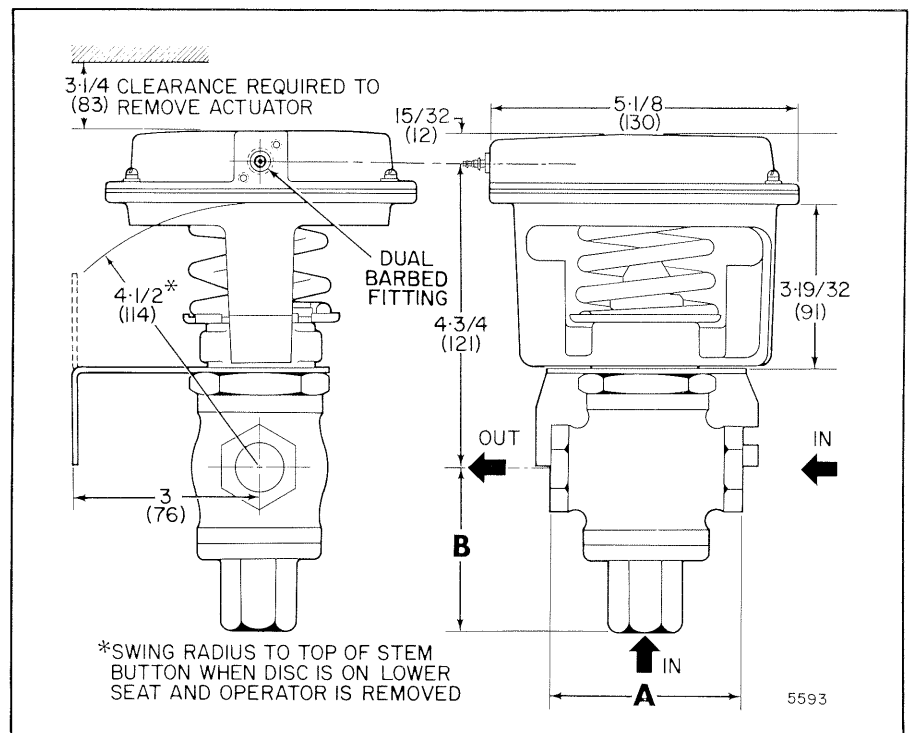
VP519C APPROXIMATE DIMENSIONS IN INCHES (MILLIMETERS) SEE TABLE 1 FOR A AND B DIMENSIONS
